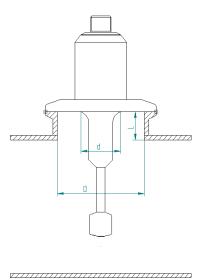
Example of an installation on a tank using or flush sensor design with a flush type weld-on connector.
